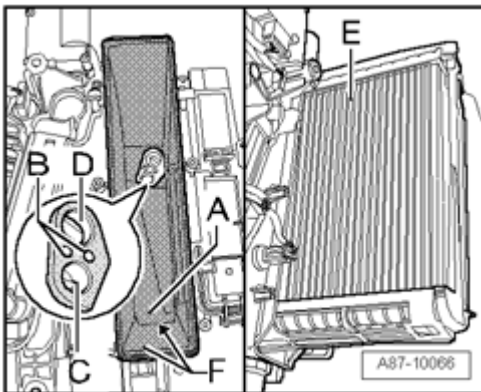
Pulling Evaporator To Right Out Of Heating And A/C Unit
